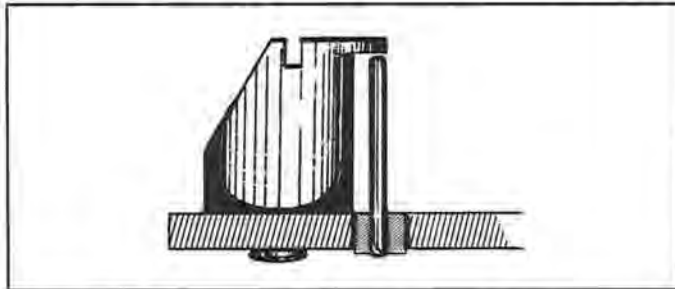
A fine piece of wire is inserted tightly in drilled hole in stump and its length is adjusted to fit regulator key.
